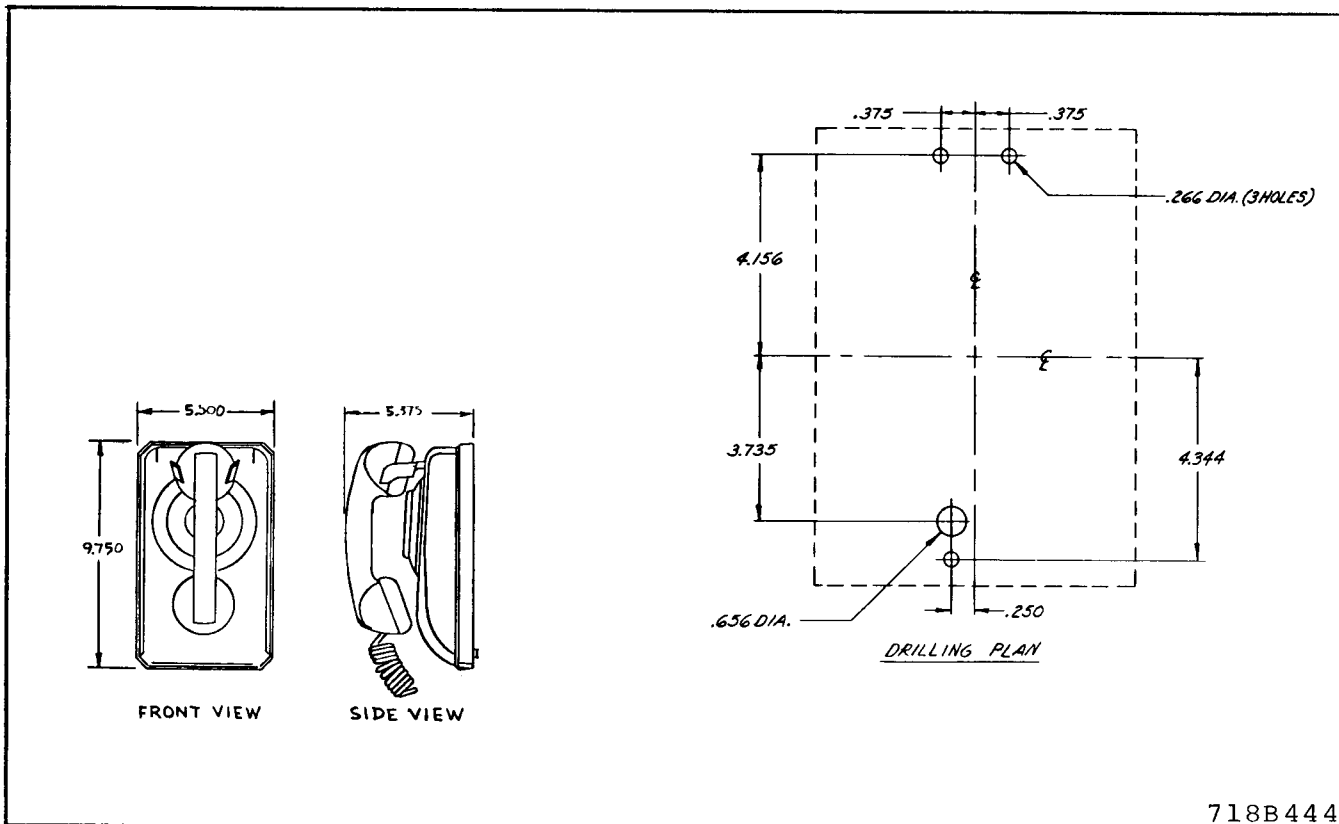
Mounting Dimensions for wall mounted Hookswitch- Handset Assembly
